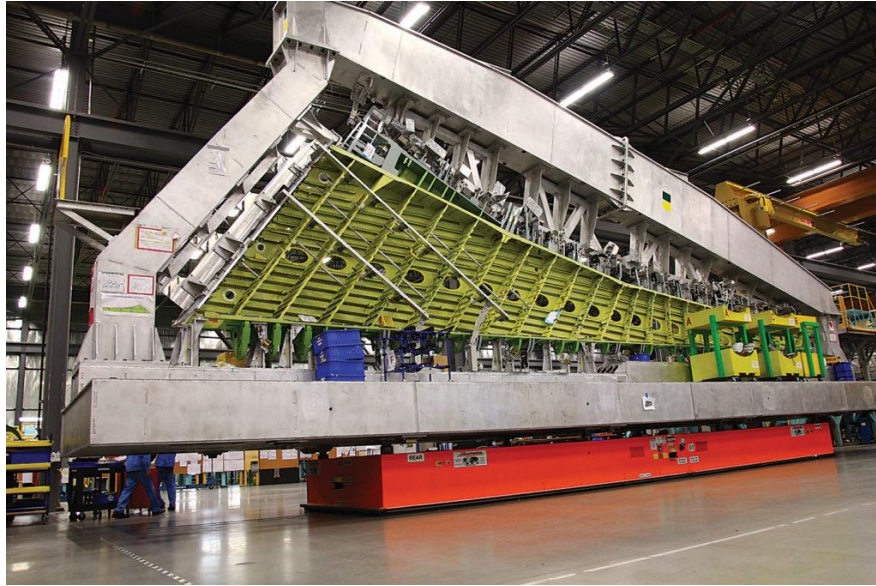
Global 5000/6000 assembly jig at MHI – Extracted from [4]
